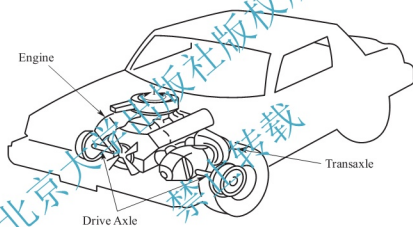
8 Front-wheel Drive Car with In-line engine
